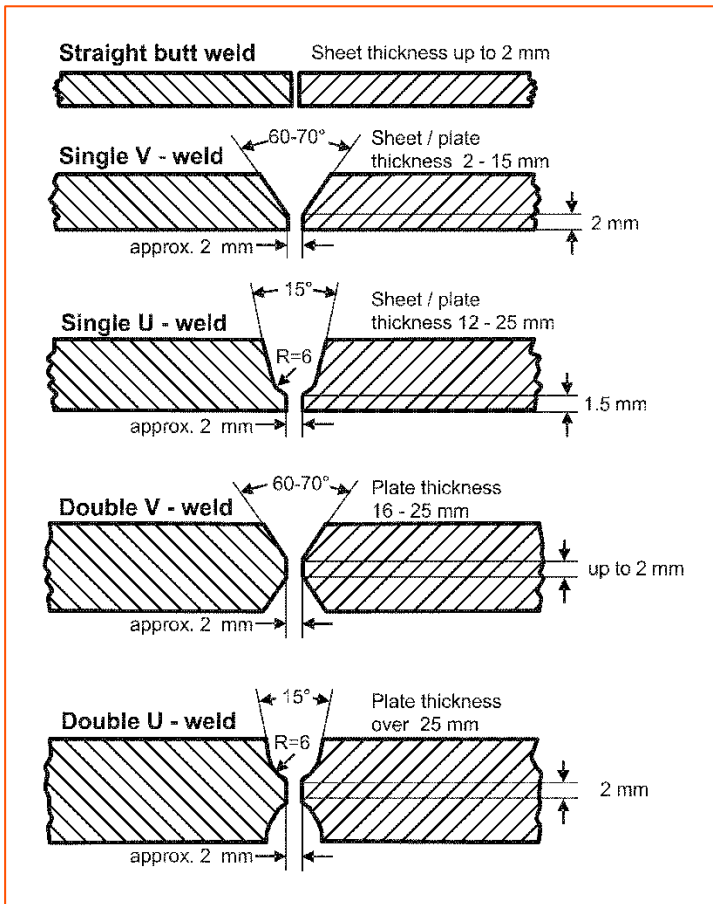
Seam preparation for welding nickel alloys and special stainless steels
